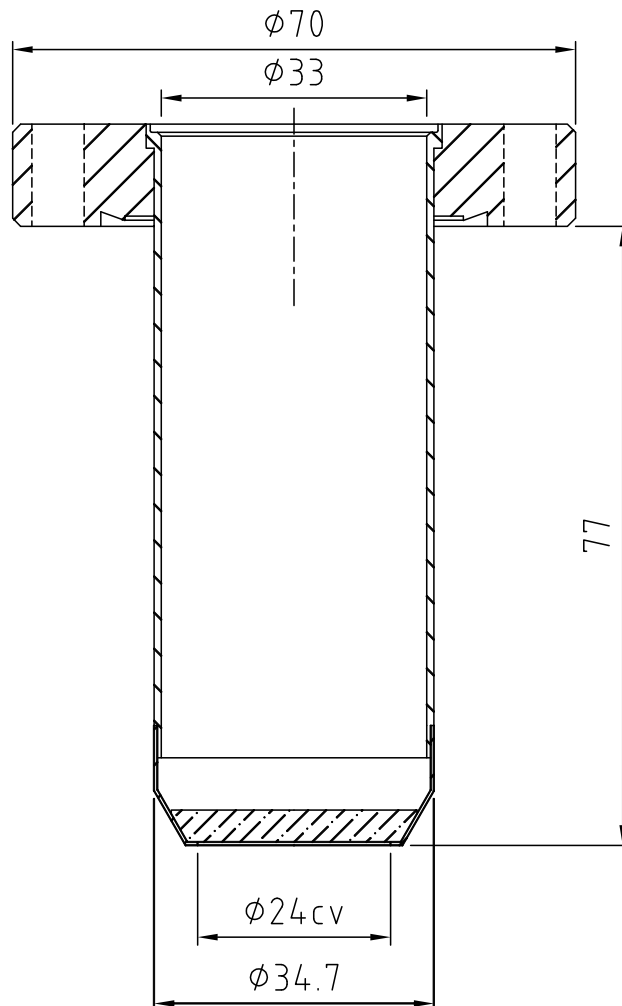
Technical drawing of the inverted CF40 viewport located at the main chamber. Dimensions are given in millimeter. Figure reprinted with permission from UKAEA, United Kingdom.
